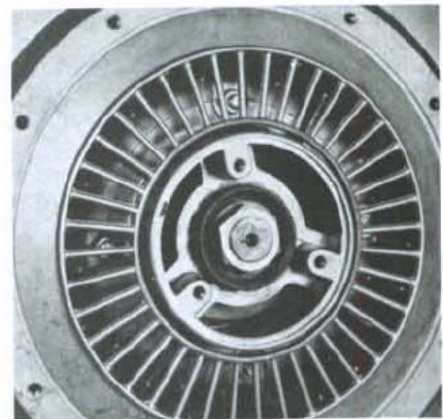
View of fan cover with rope pulley removed, showing details of construction.
